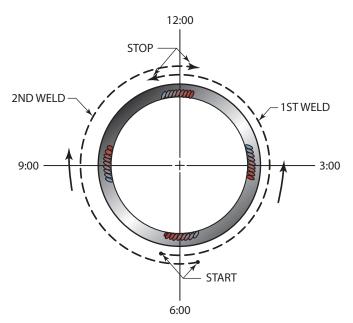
Tack welds on pipe in 5G position and the welding sequence.
